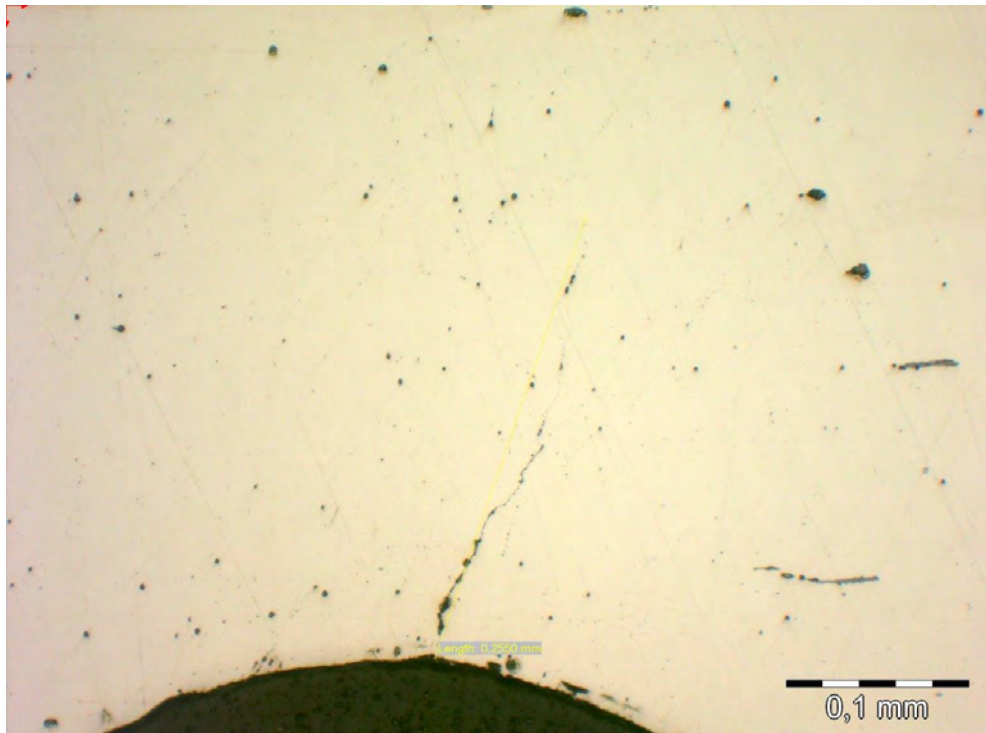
Crack at segment C, second ridge on barrel no. 1393
